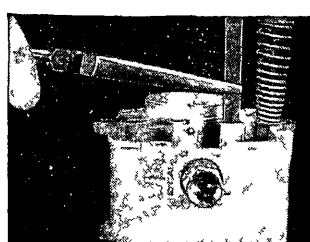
Remove pump plunger and rod, pump spring and pump operating link
